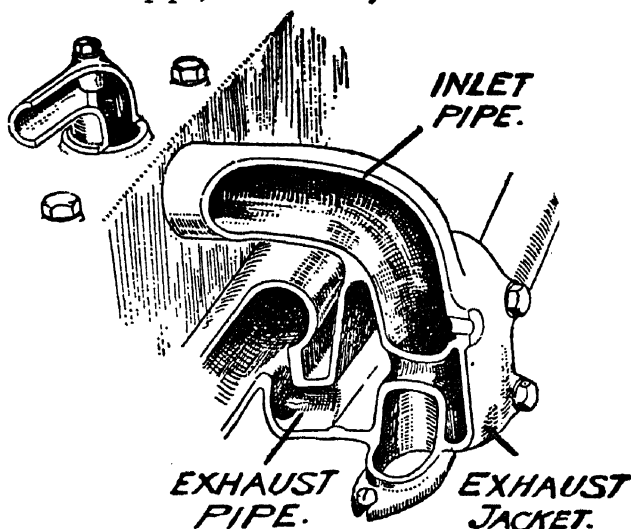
Exhaust Jacketed Inlet Manifold.
